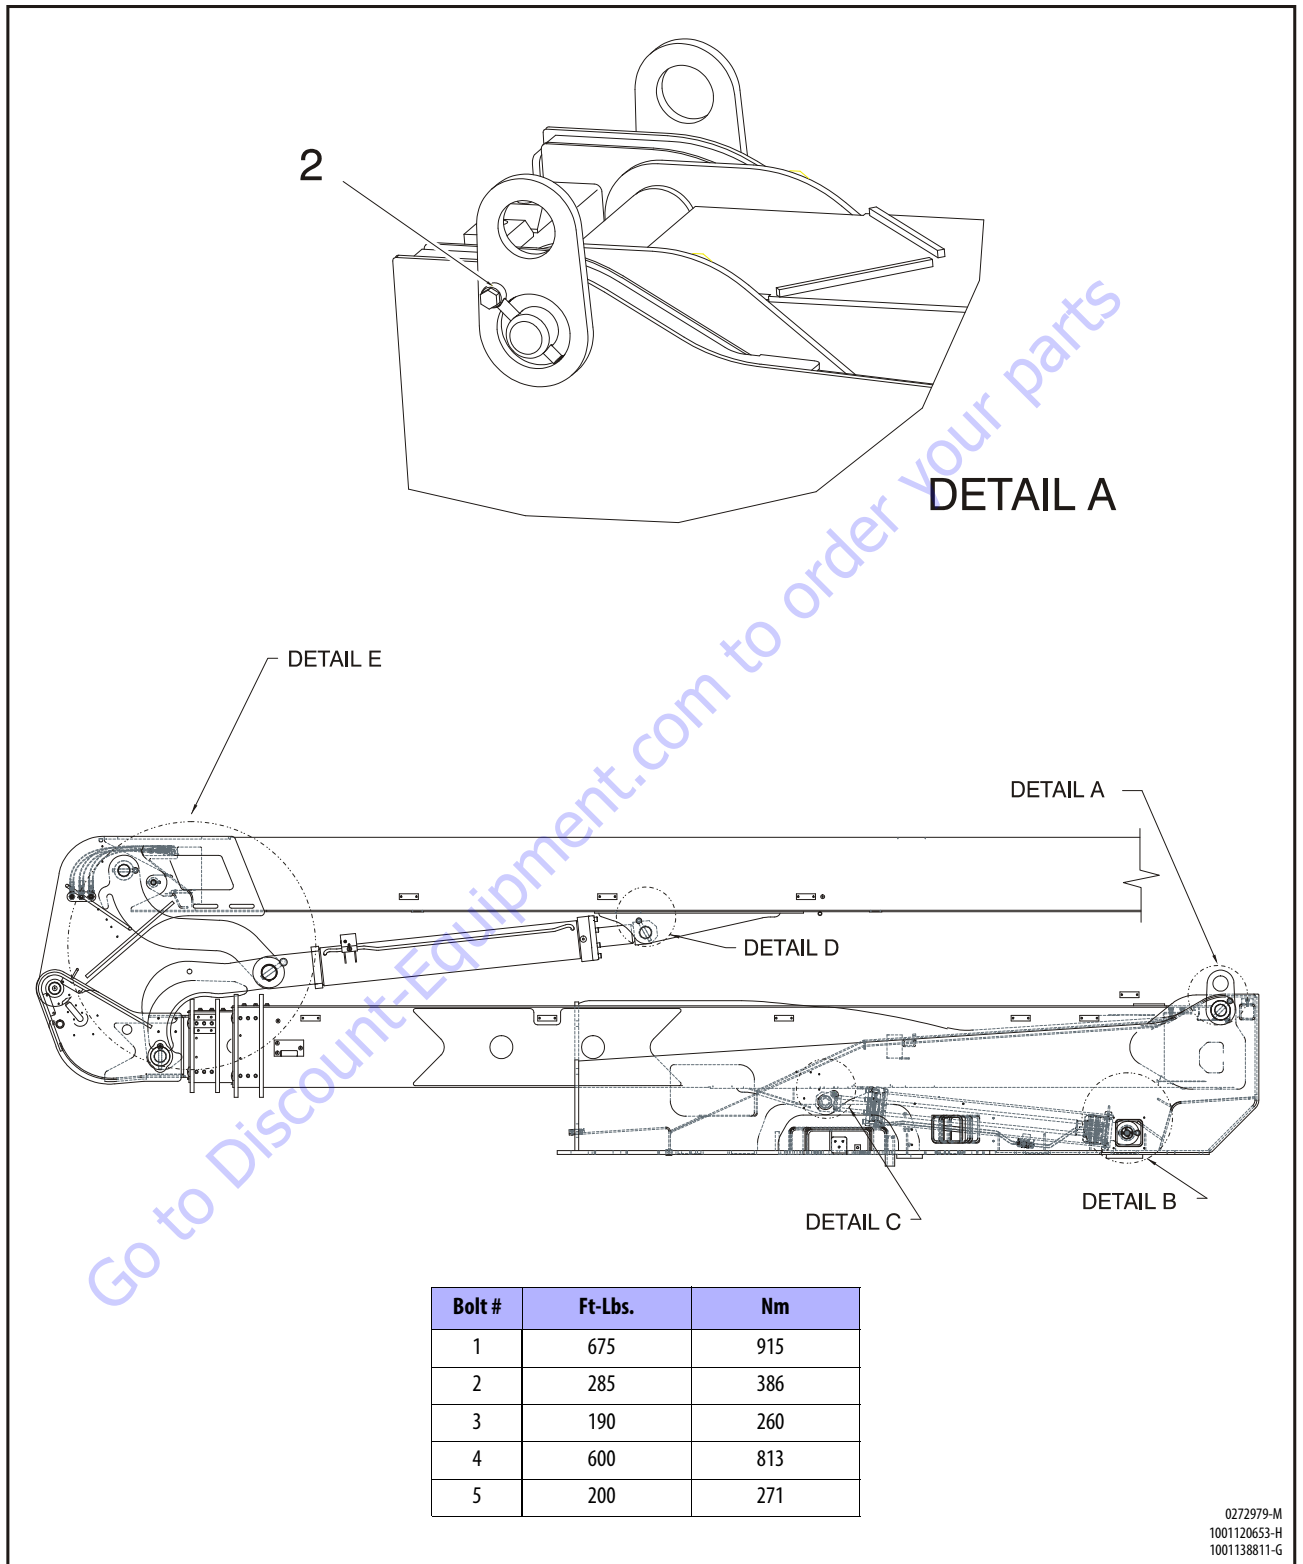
Boom and Cylinder Installation Torque Values - Sheet 1 of 3
